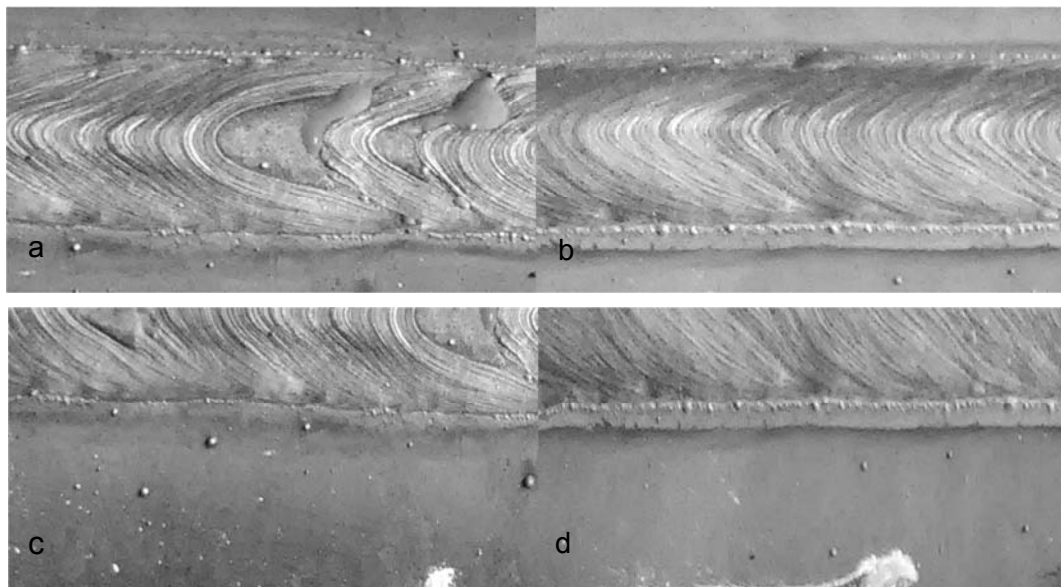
Comparison of bead weld of both samples: a) bead weld A, b) bead weld B,
